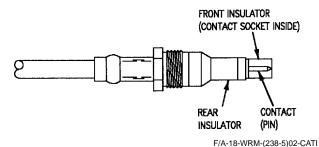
31-34179-1 Twinax Connector Repair (Sheet 2)
